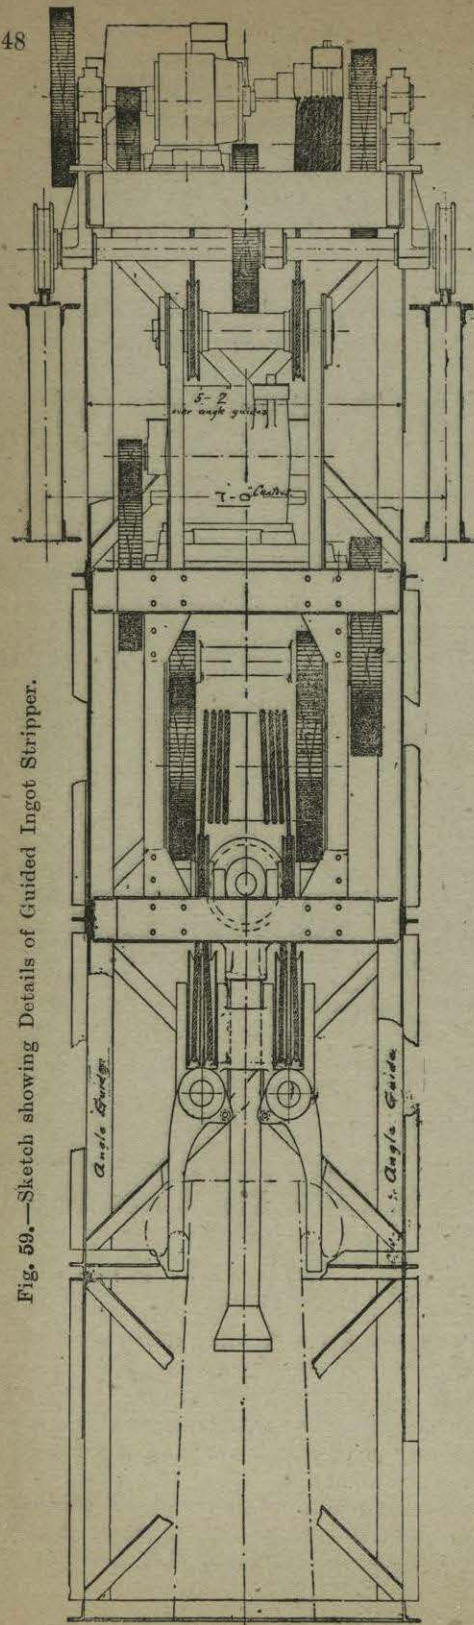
Sketch showing Details of Guided Ingot Stripper.
